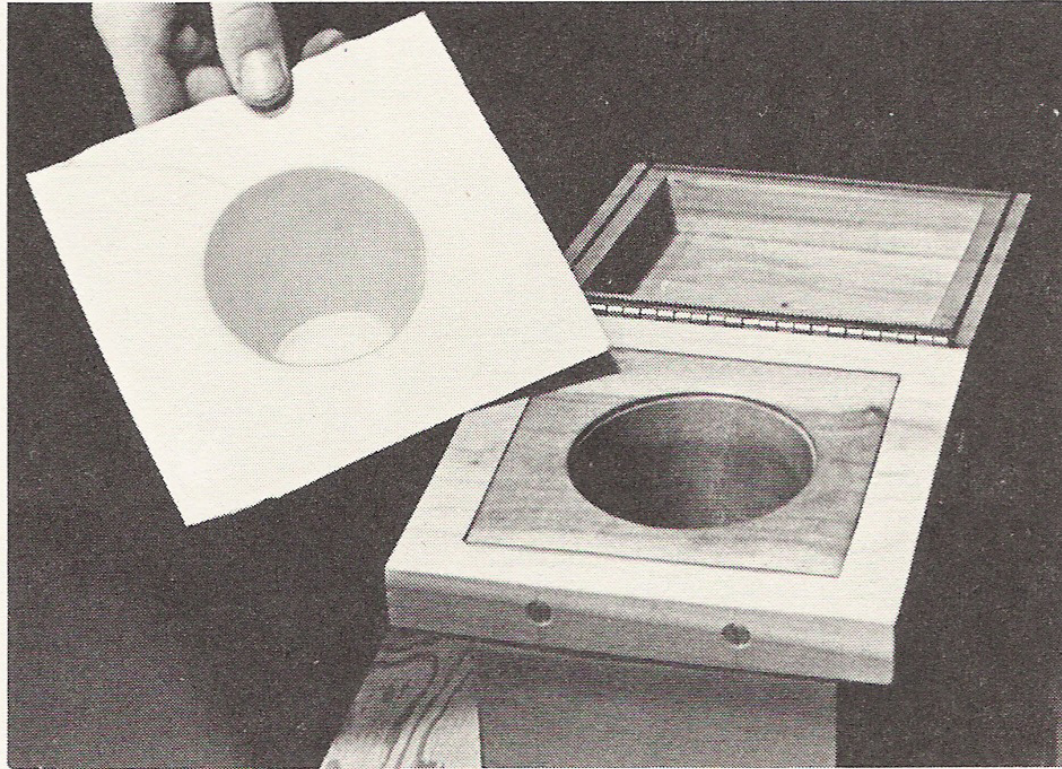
The pressure formed container is removed from the mold and is ready for trimming.
